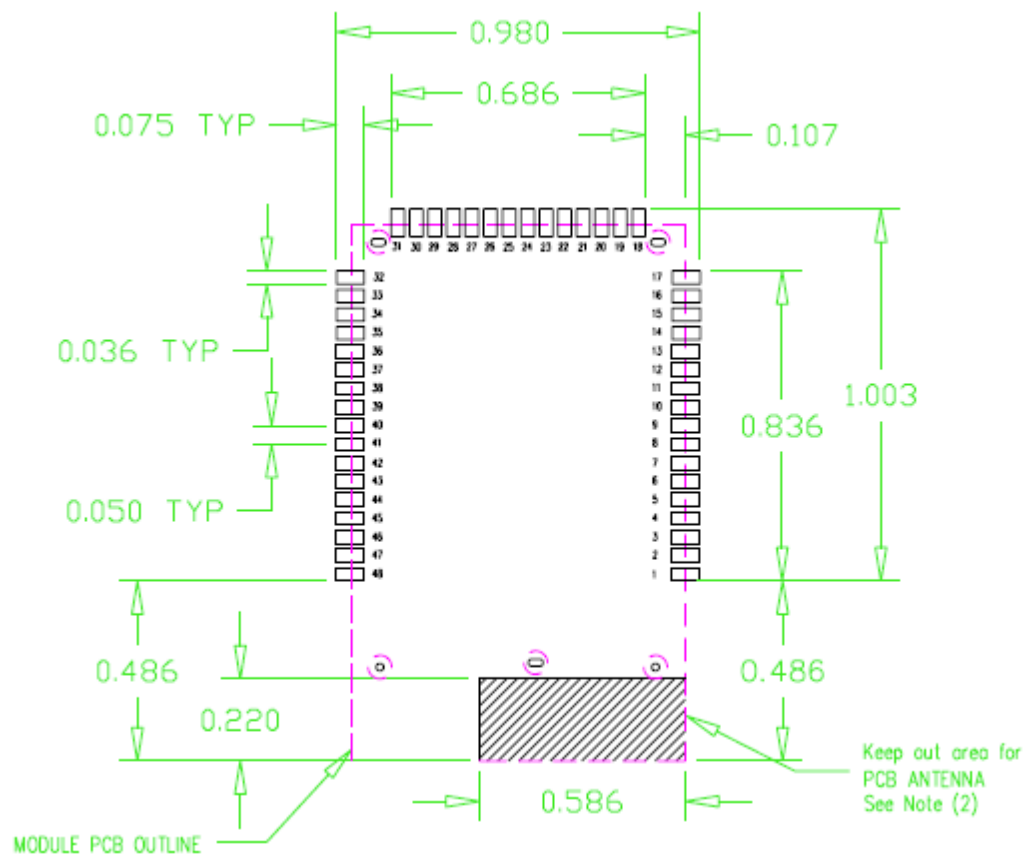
WLM10x Module Recommended PCB Footprint (dimensions are in inches)
